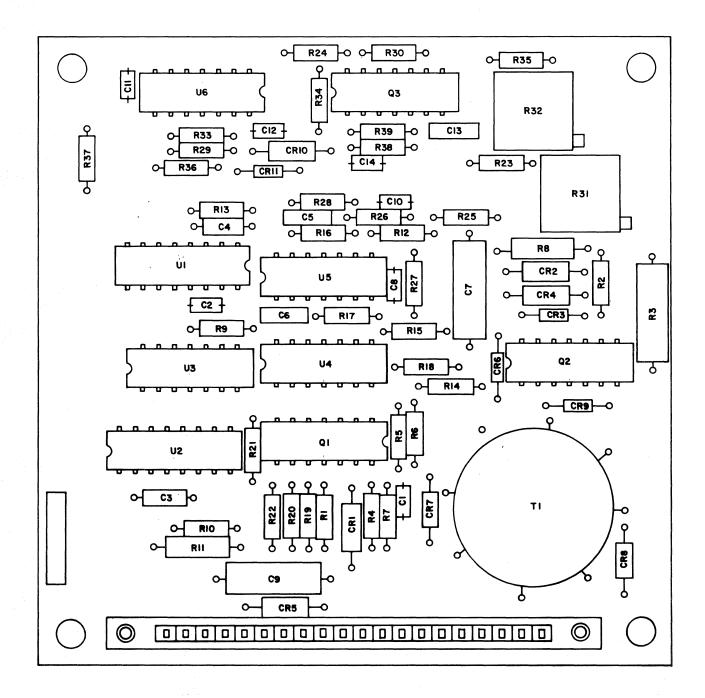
CONVERTER CONTROLLER CIRCUIT CARD ASSEMBLY
